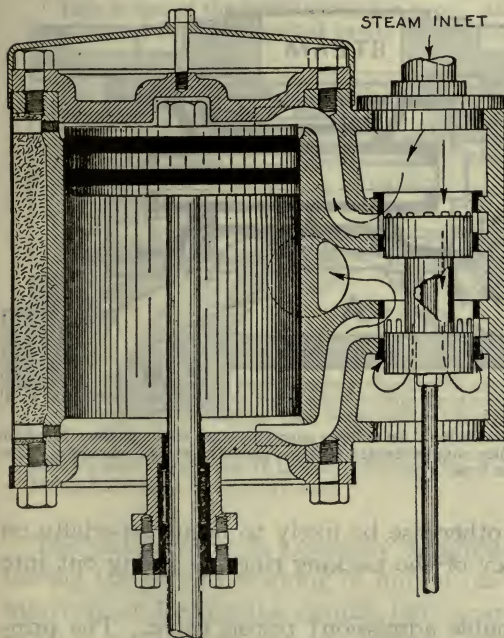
Piston valve with central passage leading to lower port. This type of valve is used where the steam pipe is attached to upper cover and is objectionable in that the central pipe is exposed externally to the exhaust steam which lowers the temperature of the live steam; also the steam pipe must be disconnected to remove the upper valve cover.
